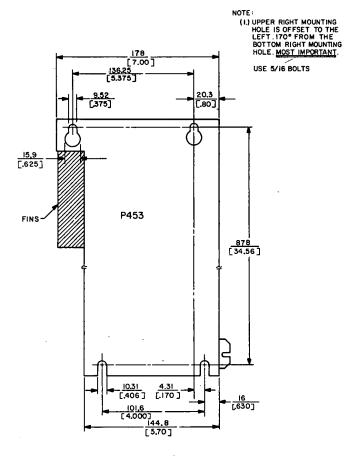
(B) P453 MOUNTING DIMENSIONS
